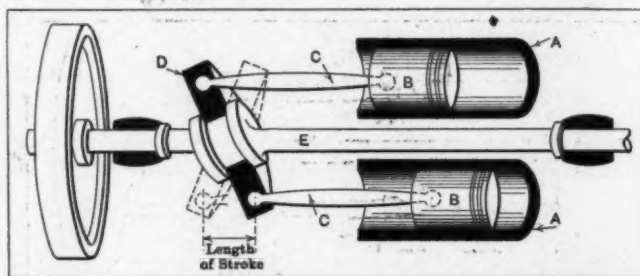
Diagrammatic sketch indicating the principles of a "wobble-gear" engine
